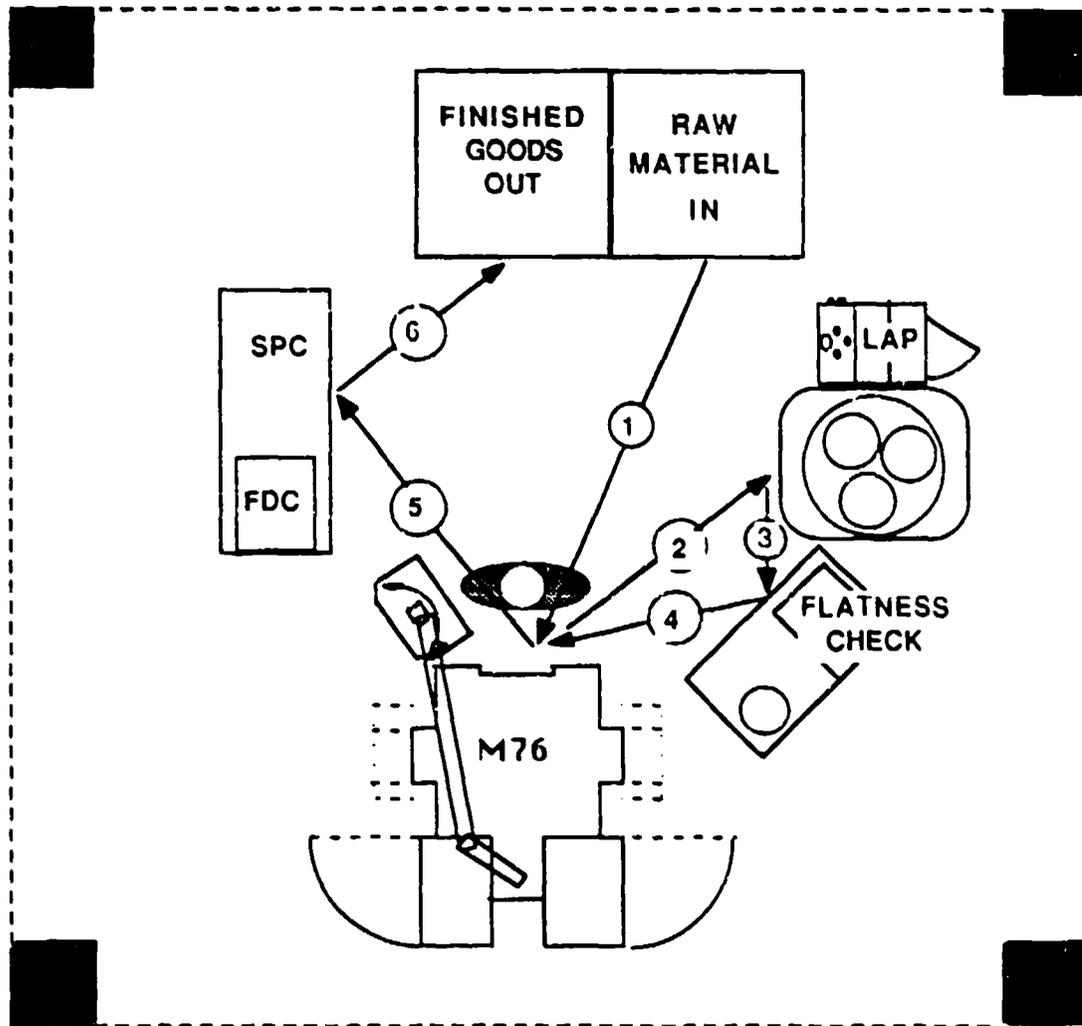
Walnut and Girth Ring Cell Floor Layout
